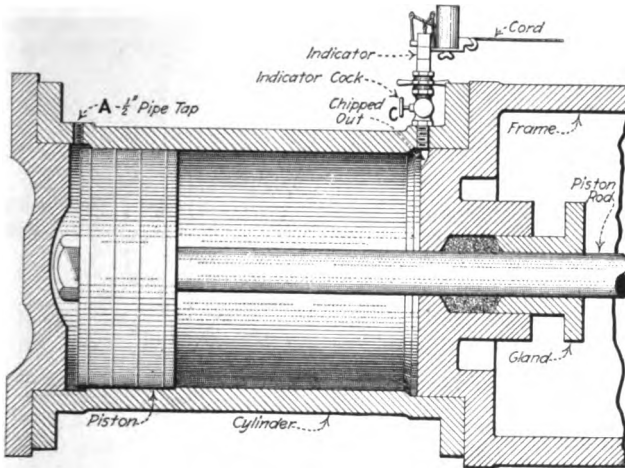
Ideal method of connecting an indicator to a cylinder.
